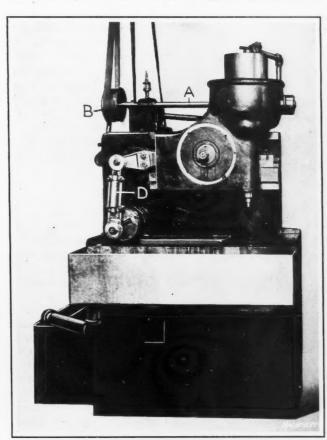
Running-in Device for Cutter-spindle Assembly of Gear Shaper
